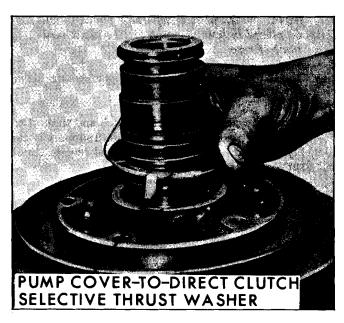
G-155 Clutch Drum Selective Thrust Washer
